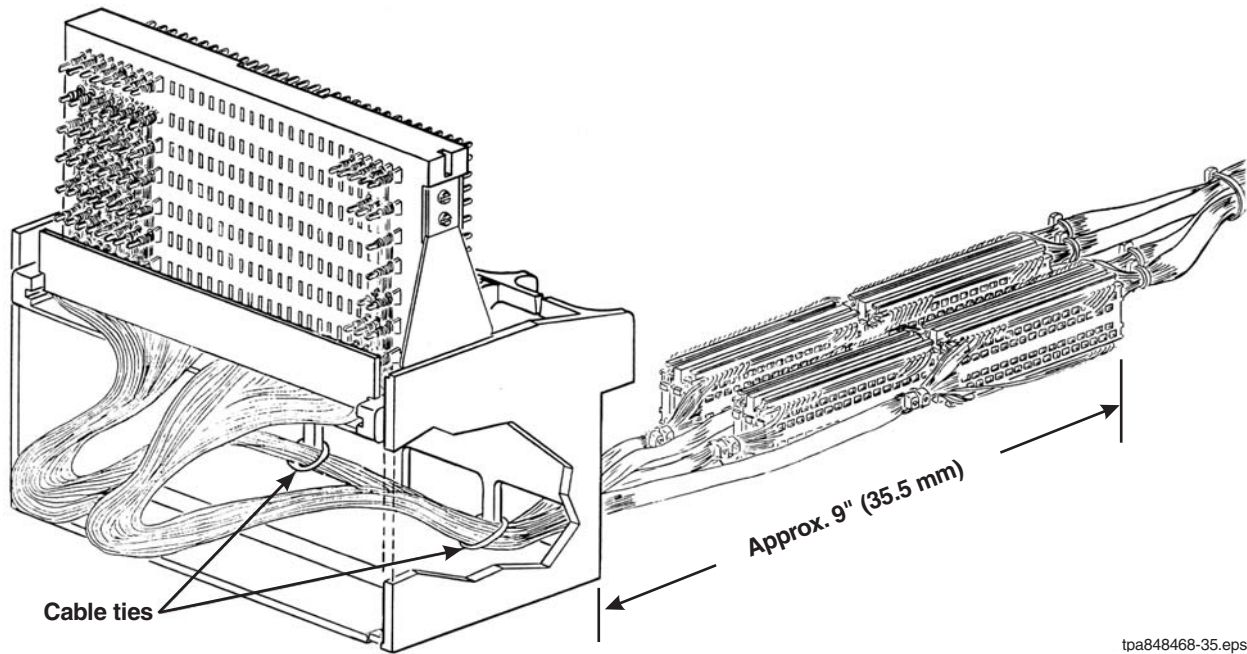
Block Rotated to Open Wiring Position with 711-Type Connectors
